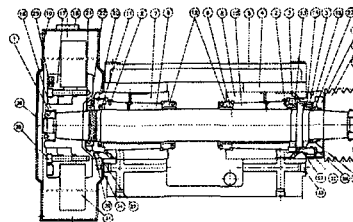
Drawings of the developed cam profile CNC grinding machine
